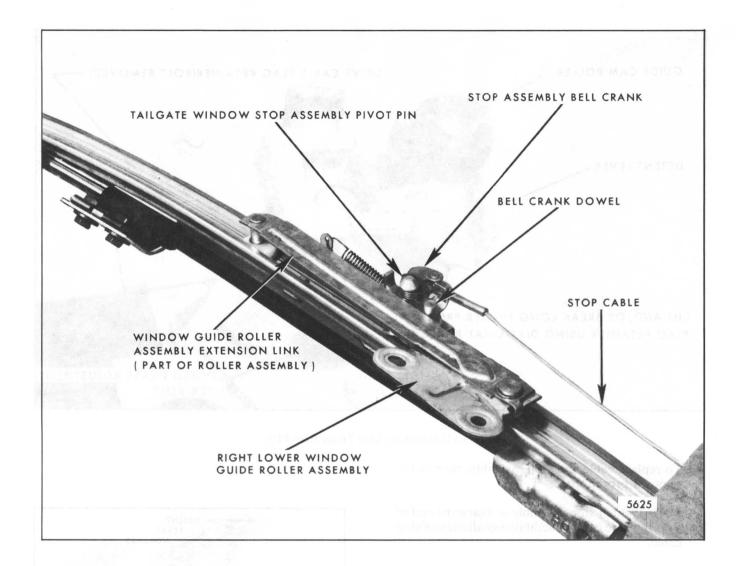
Window Stop Cable and Clip Assembly Adjustment
